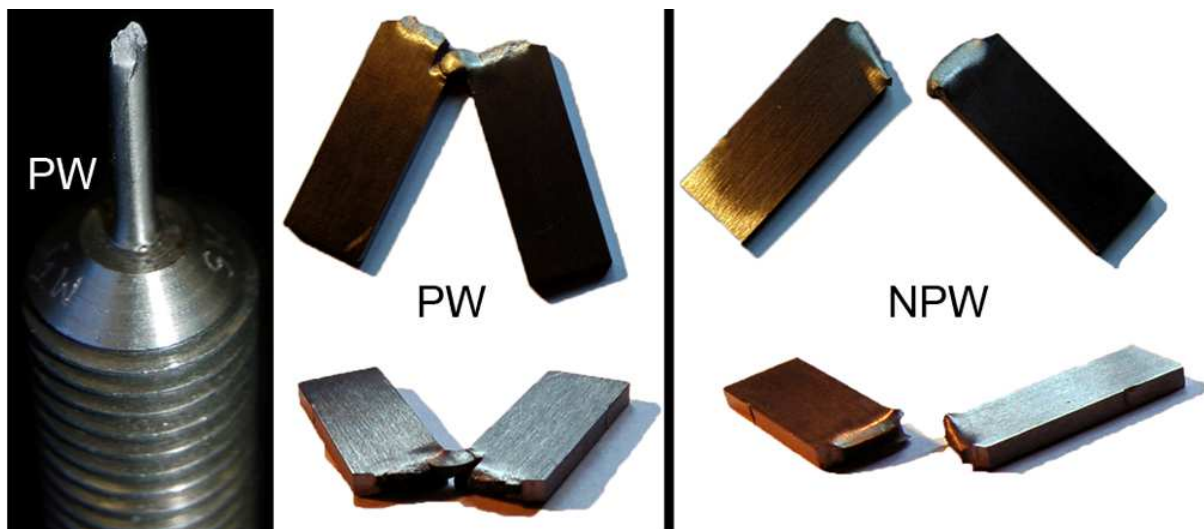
Images of specimens after mechanical testing: PW tensile specimen that fractured along a weld-line interface (left); aerial and oblique views of the PW specimen that remained intact along an unbroken rod (middle), and aerial and oblique views of the NPW specimen (right).
